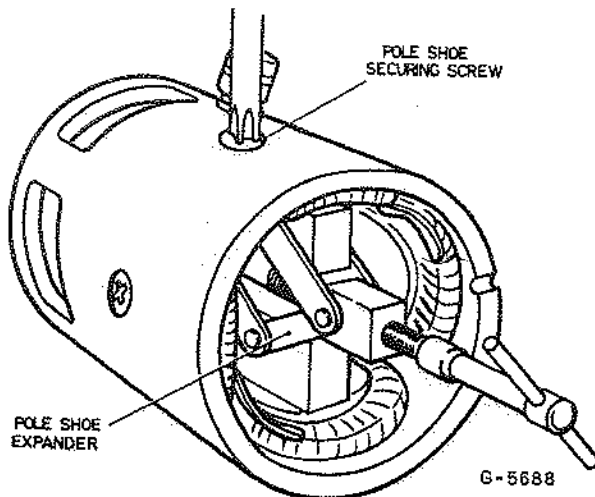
Tightening Pole Shoe Retaining Screws Using Pole Shoe Expander
